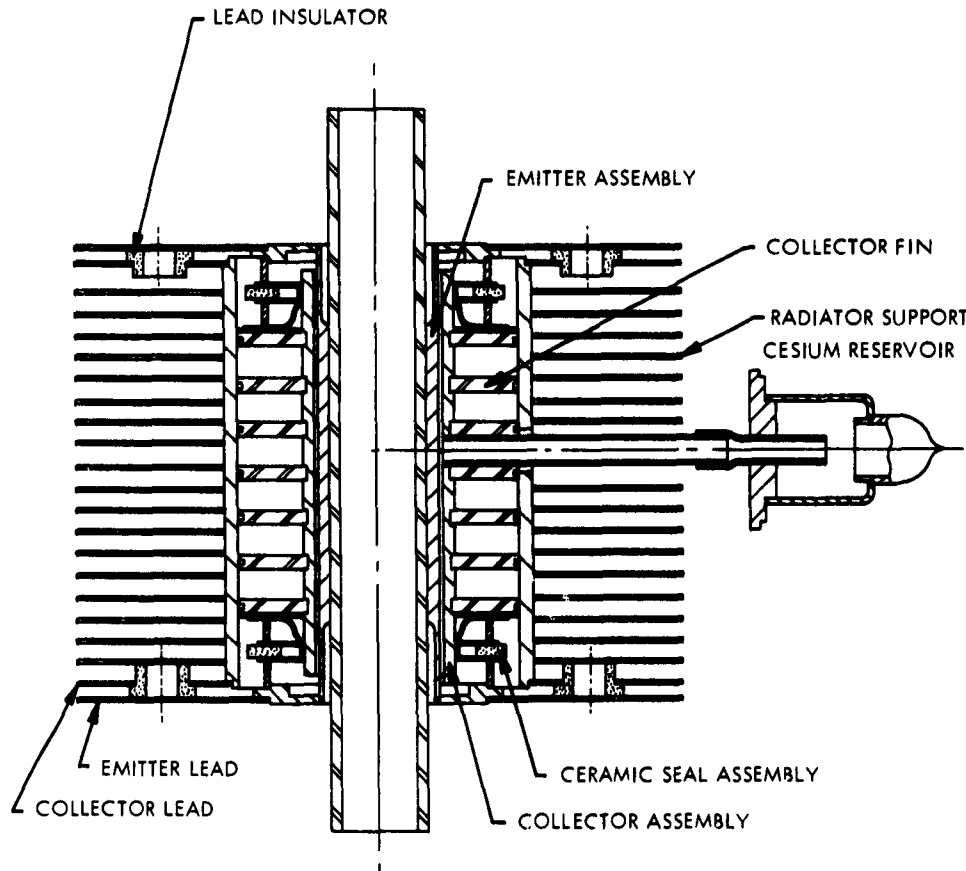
THERMIONIC CONVERTER ASSEMBLY DRAWING
